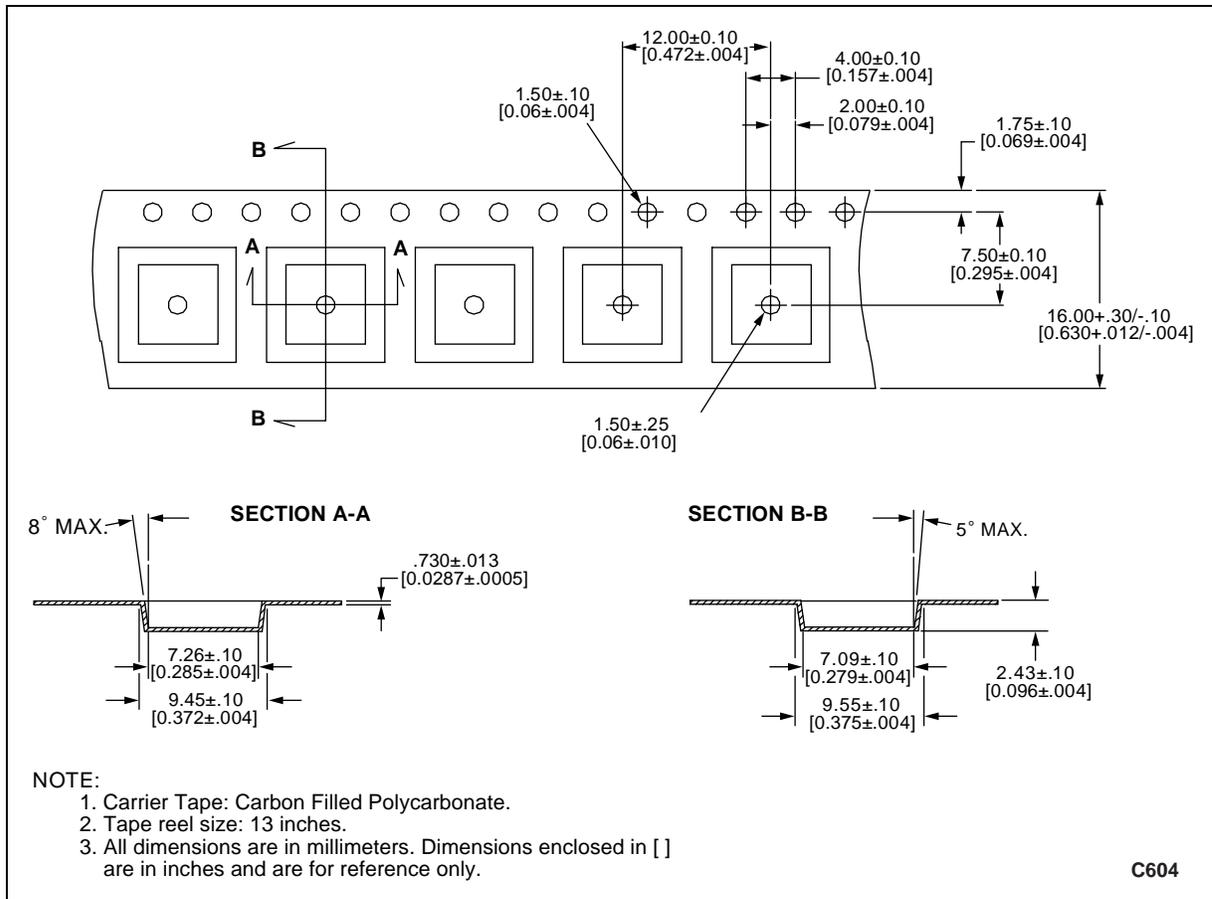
48-pin TQFP Tape and Reel Dimensions
